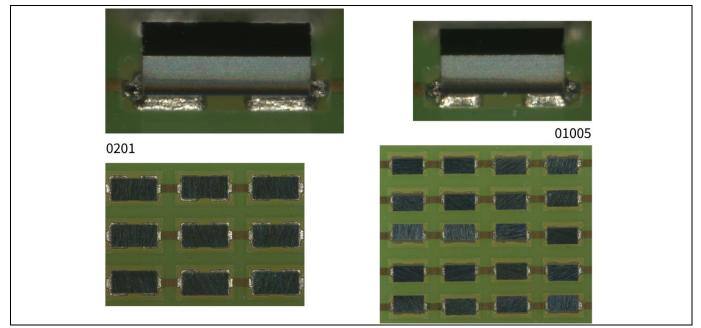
Top and side views of properly mounted WLL packages of 0201 (left) and 01005 size (right).
